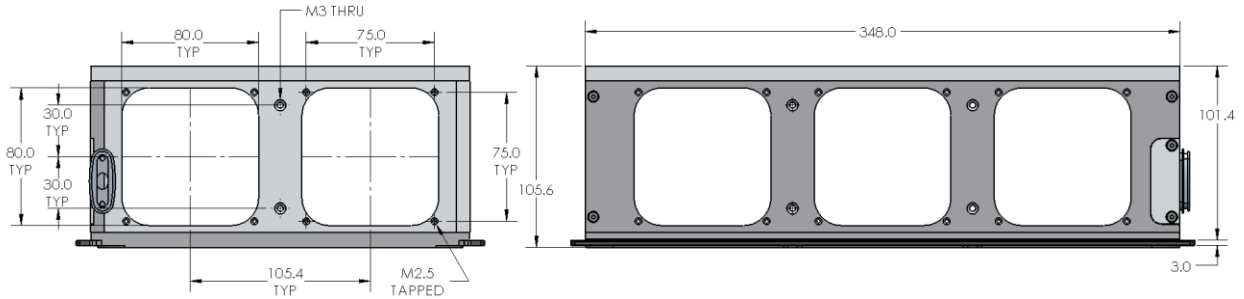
EXTERNAL DIMENSIONS - SIDE
